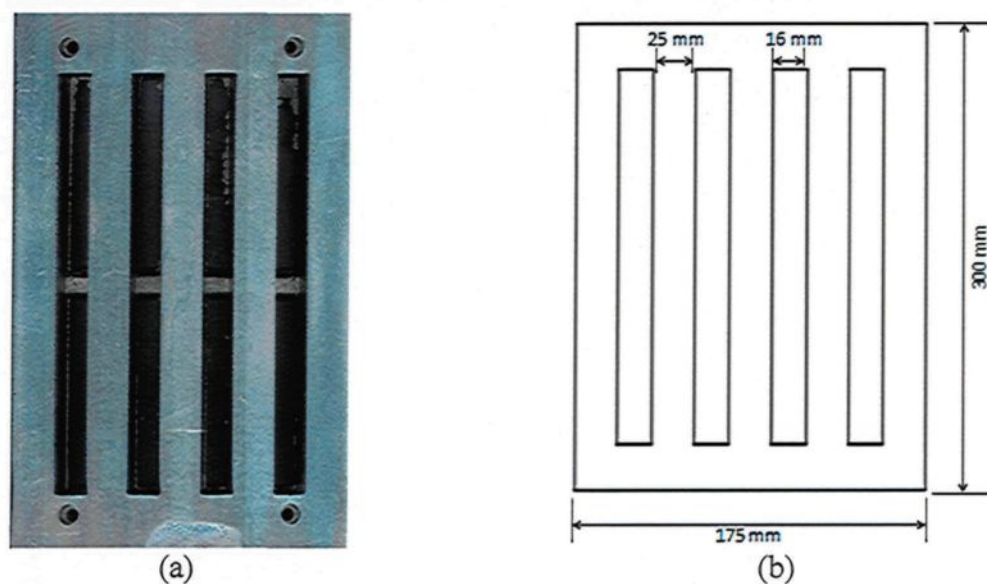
(a) Specimen block ready for drilling test; (b) diagram showing dimensions of the test block.
